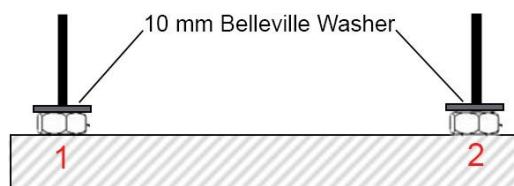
Multiple Tilt Beams Bolting Diagram – Stage 1
